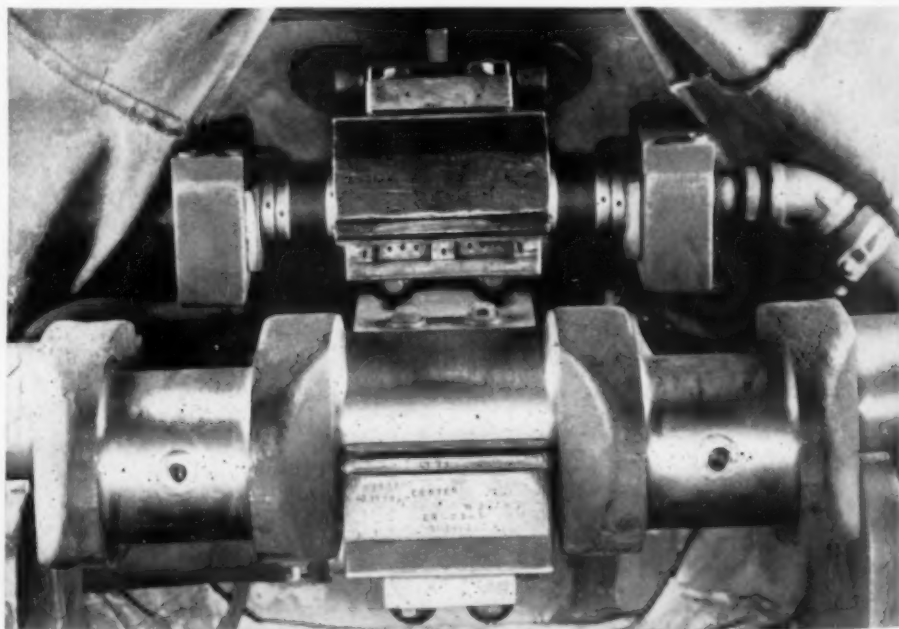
Induction Heating and Water Quenching Fixture for the Main Bearing on 336-Lb. Crankshaft
